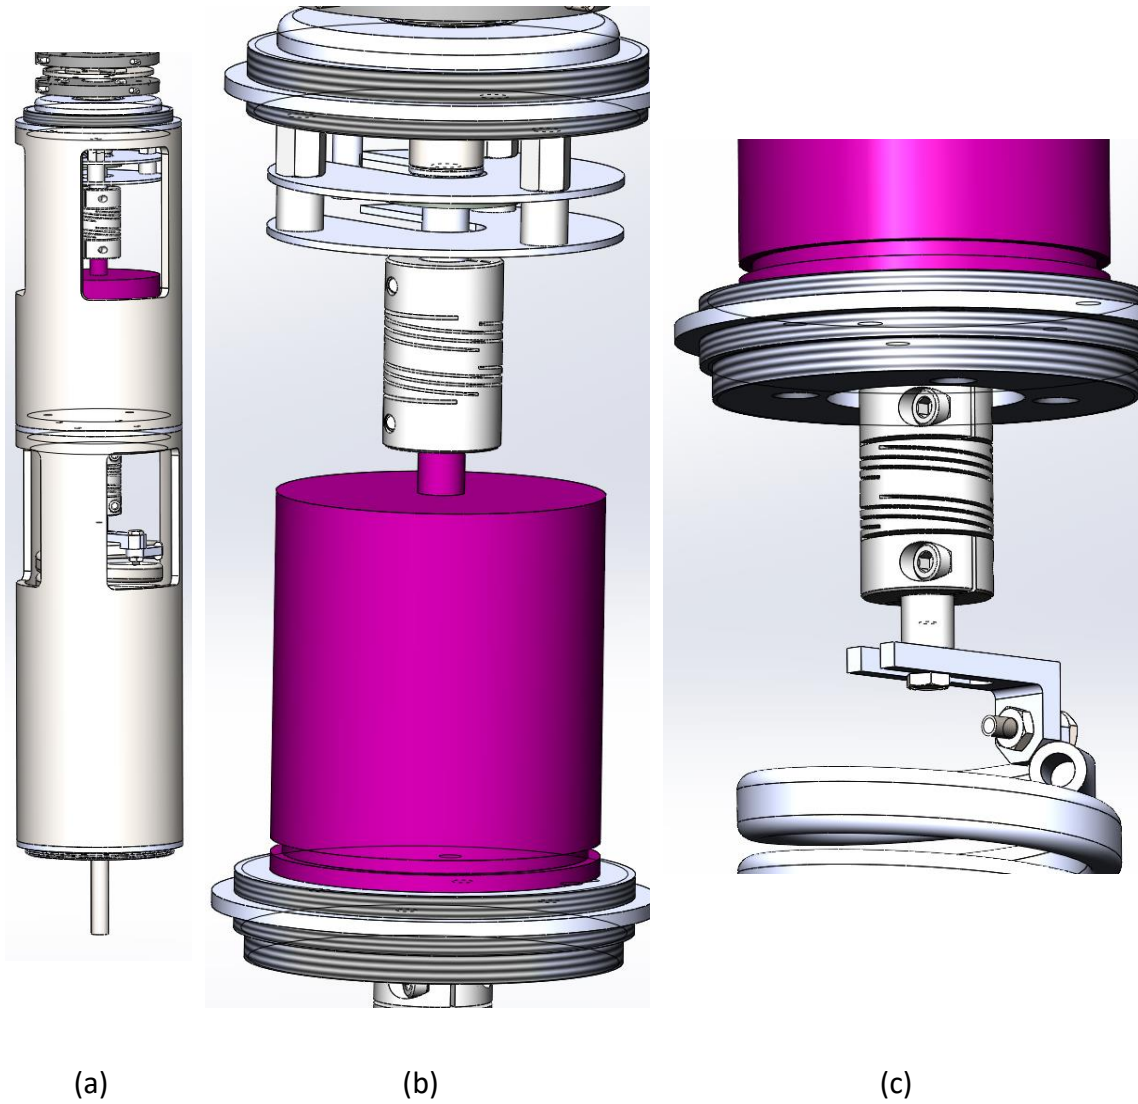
Solidworks models of (a) the housing, (b) the gear box, and (c) the connection between the Bourdon tube and the gear box.
